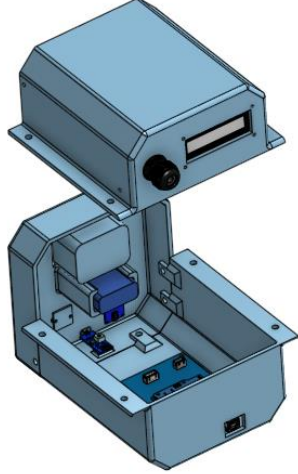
Assembly of the steel coil weighing system enclosure
